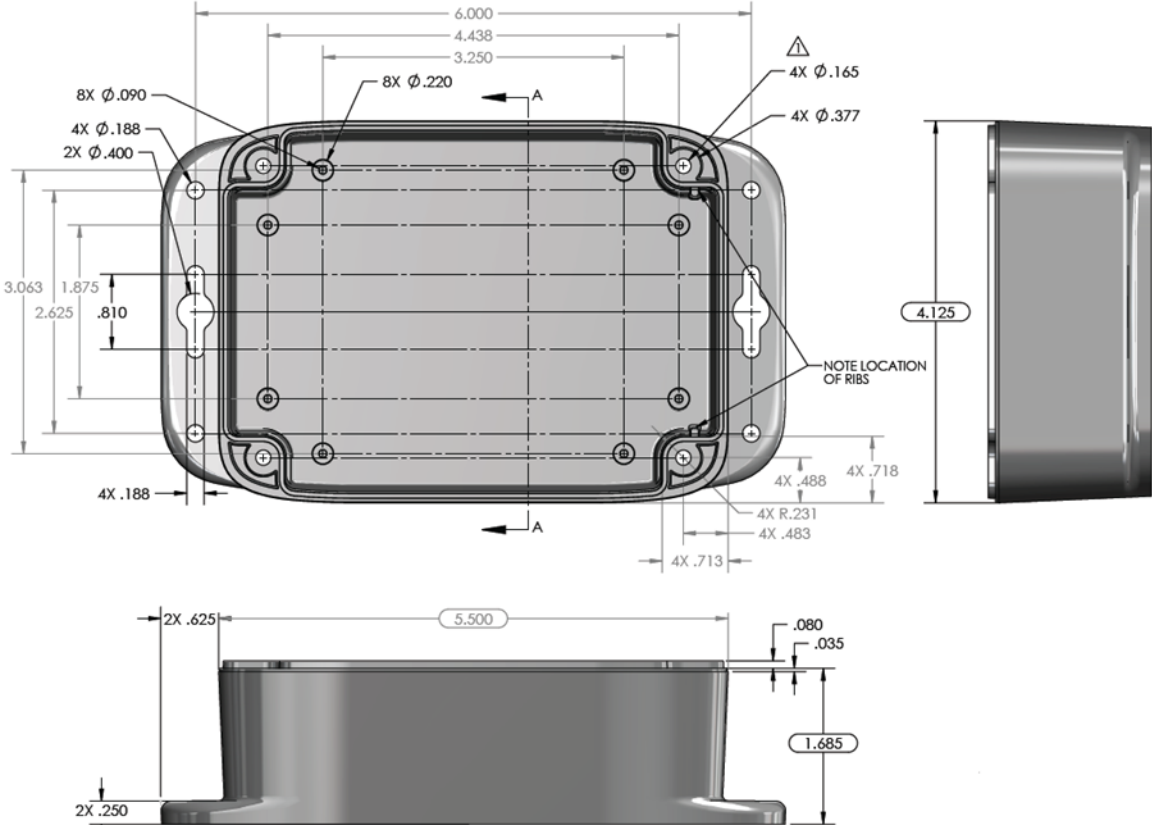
Wireless transceiver dimensions for laser distance sensor. All dimensions are in inch.
